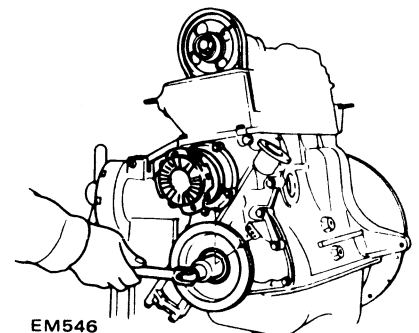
Installing Crankshaft Pulley and Water Pump
